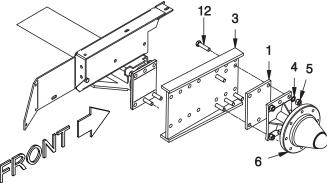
Mounting Wheel Extension, Spacer and Hub
